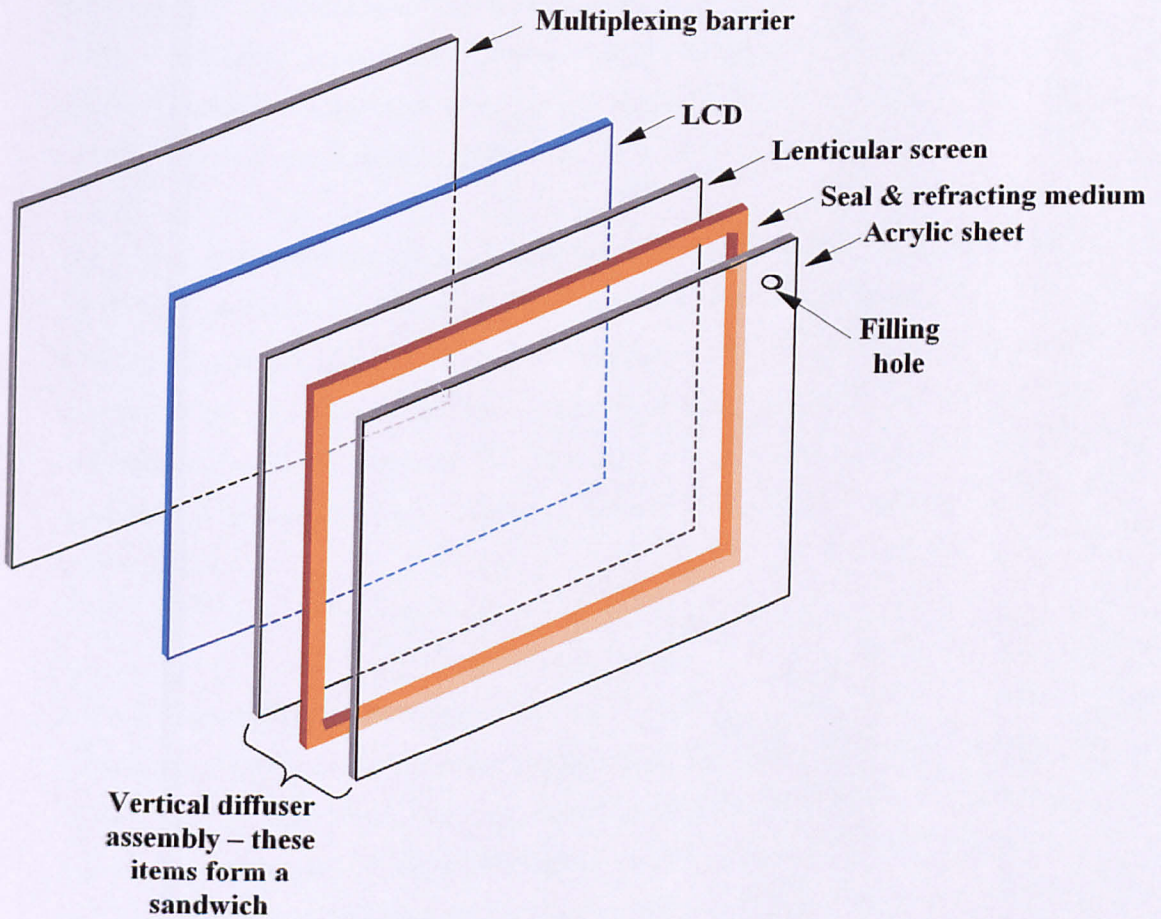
EXPLODED VIEW OF SCREEN LAYERS
